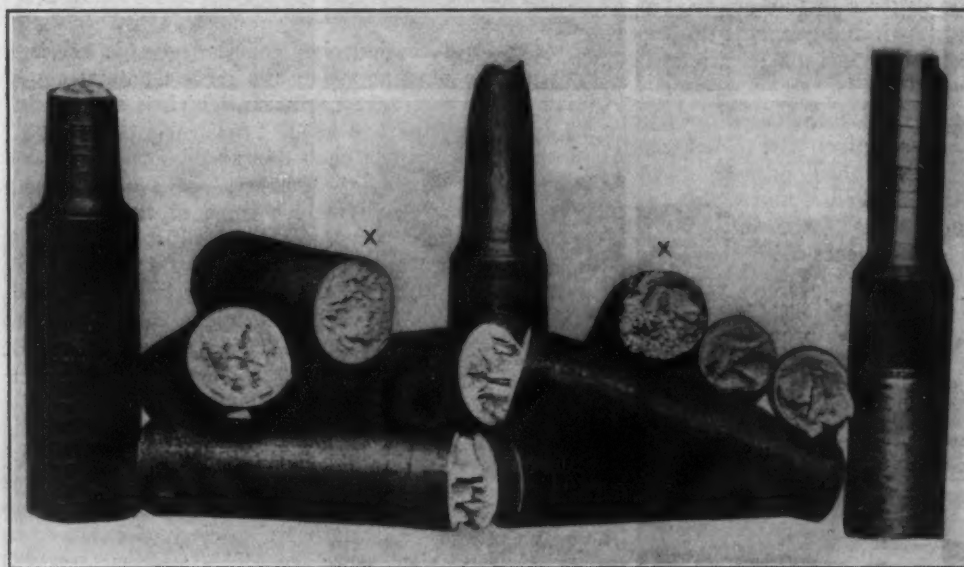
Fractured Pieces of Case Hardened Mild Steel.—Pieces Marked X Show Poor, and the Others Good, Heat Treatment.
